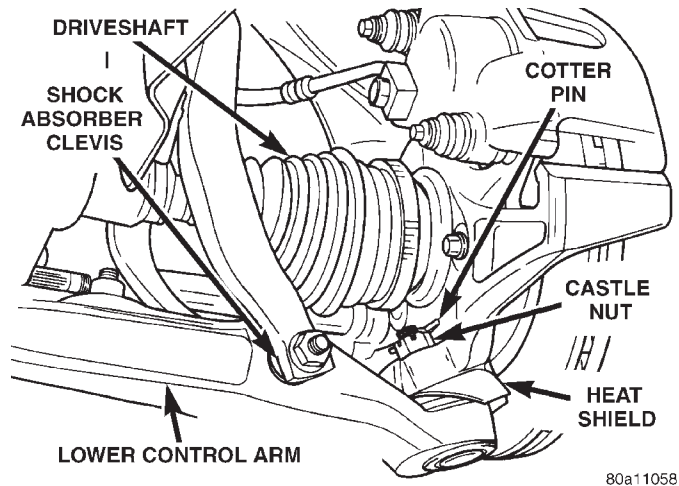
Lower Ball Joint Attachment To Steering Knuckle
